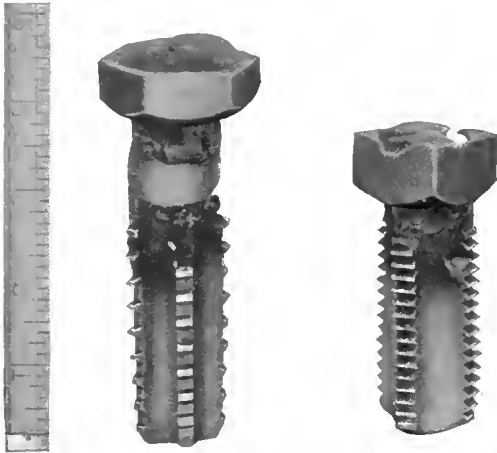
Taps Removed by Arc Welding after being broken in work
